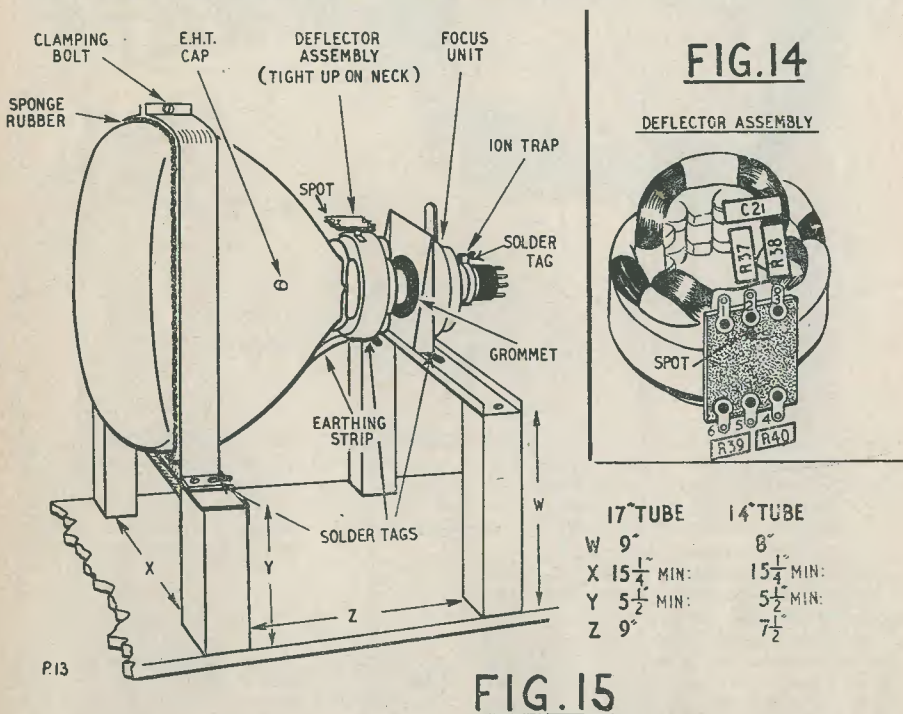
Tag layout on the scan coil assembly, showing also the resistors and condenser which are connected to it. Fig. 15. The tube mounting assembly
